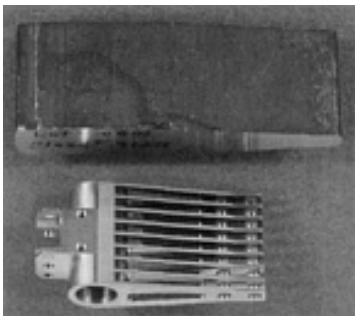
Aluminum-beryllium alloy AIBeMet 160 disk drive actuator arm. Courtesy of Brush Wellman
